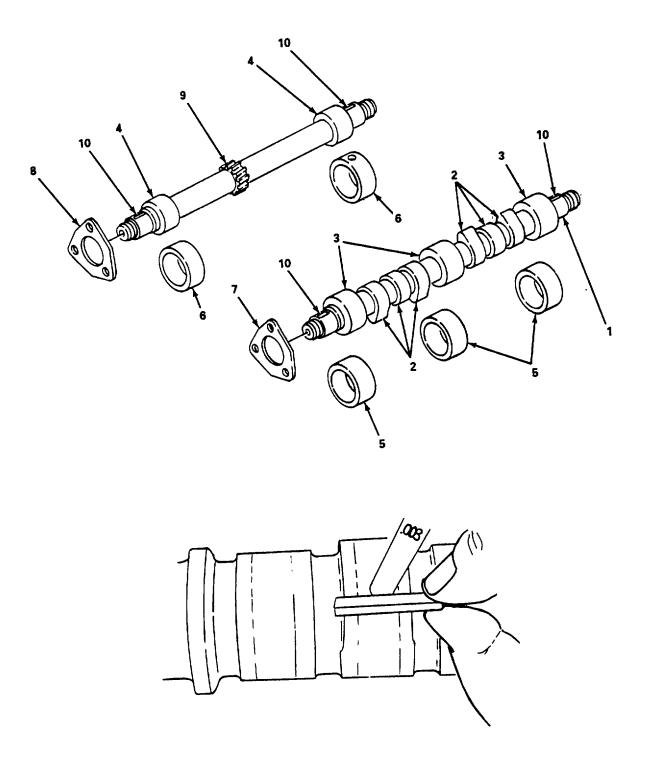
Camshaft, Balance Shaft and Bearings, Inspection.
